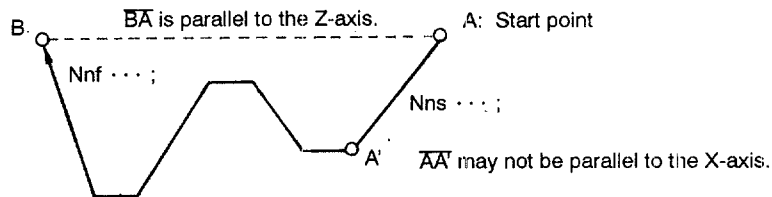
Restrictions on the End Block of Finishing Shape Program
